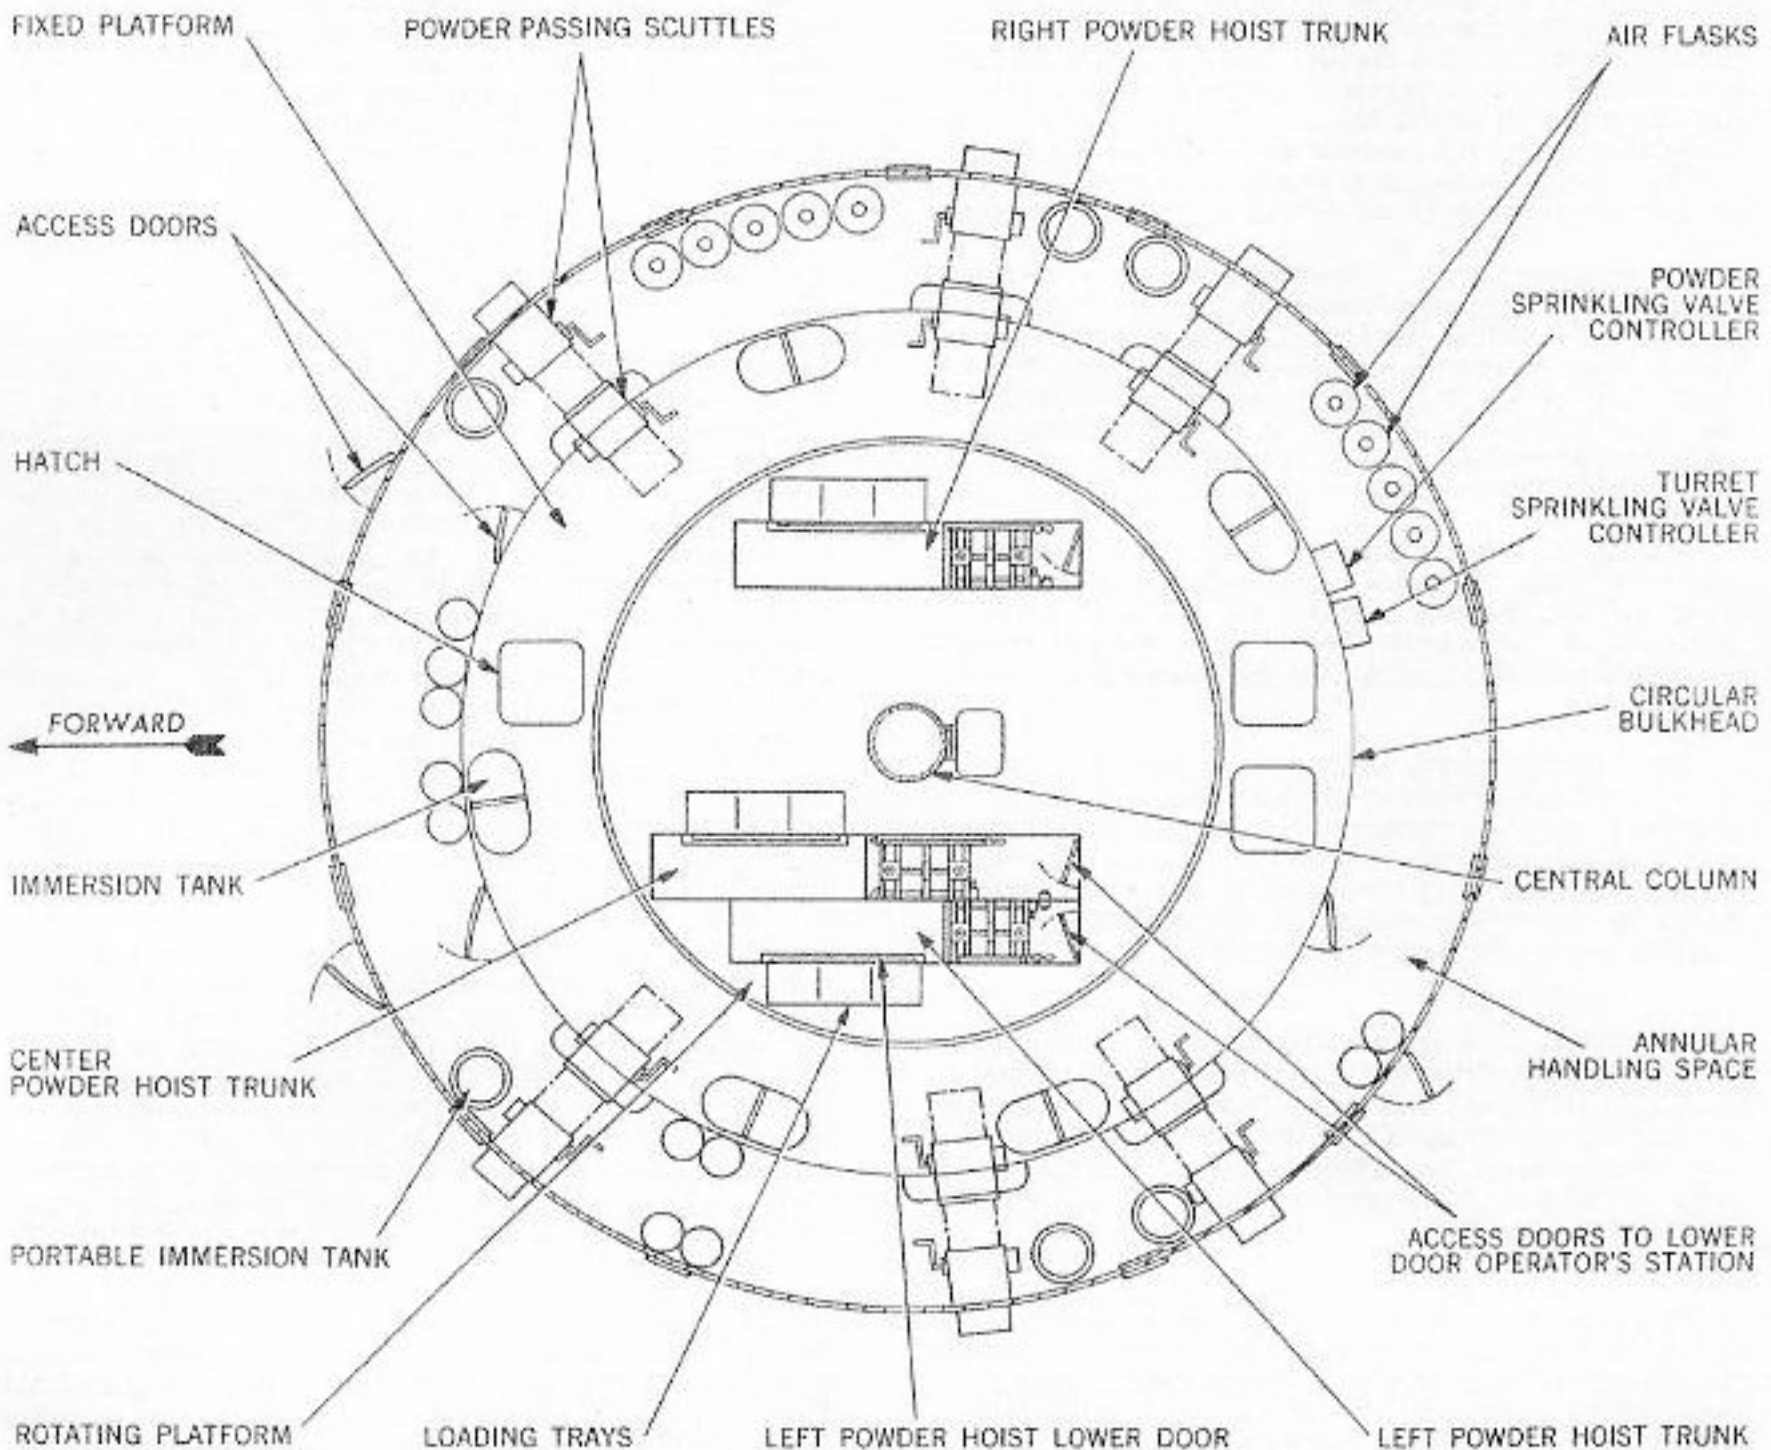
Ordnance Equipment on Powder Handling Flat - General Arrangement - Plan
